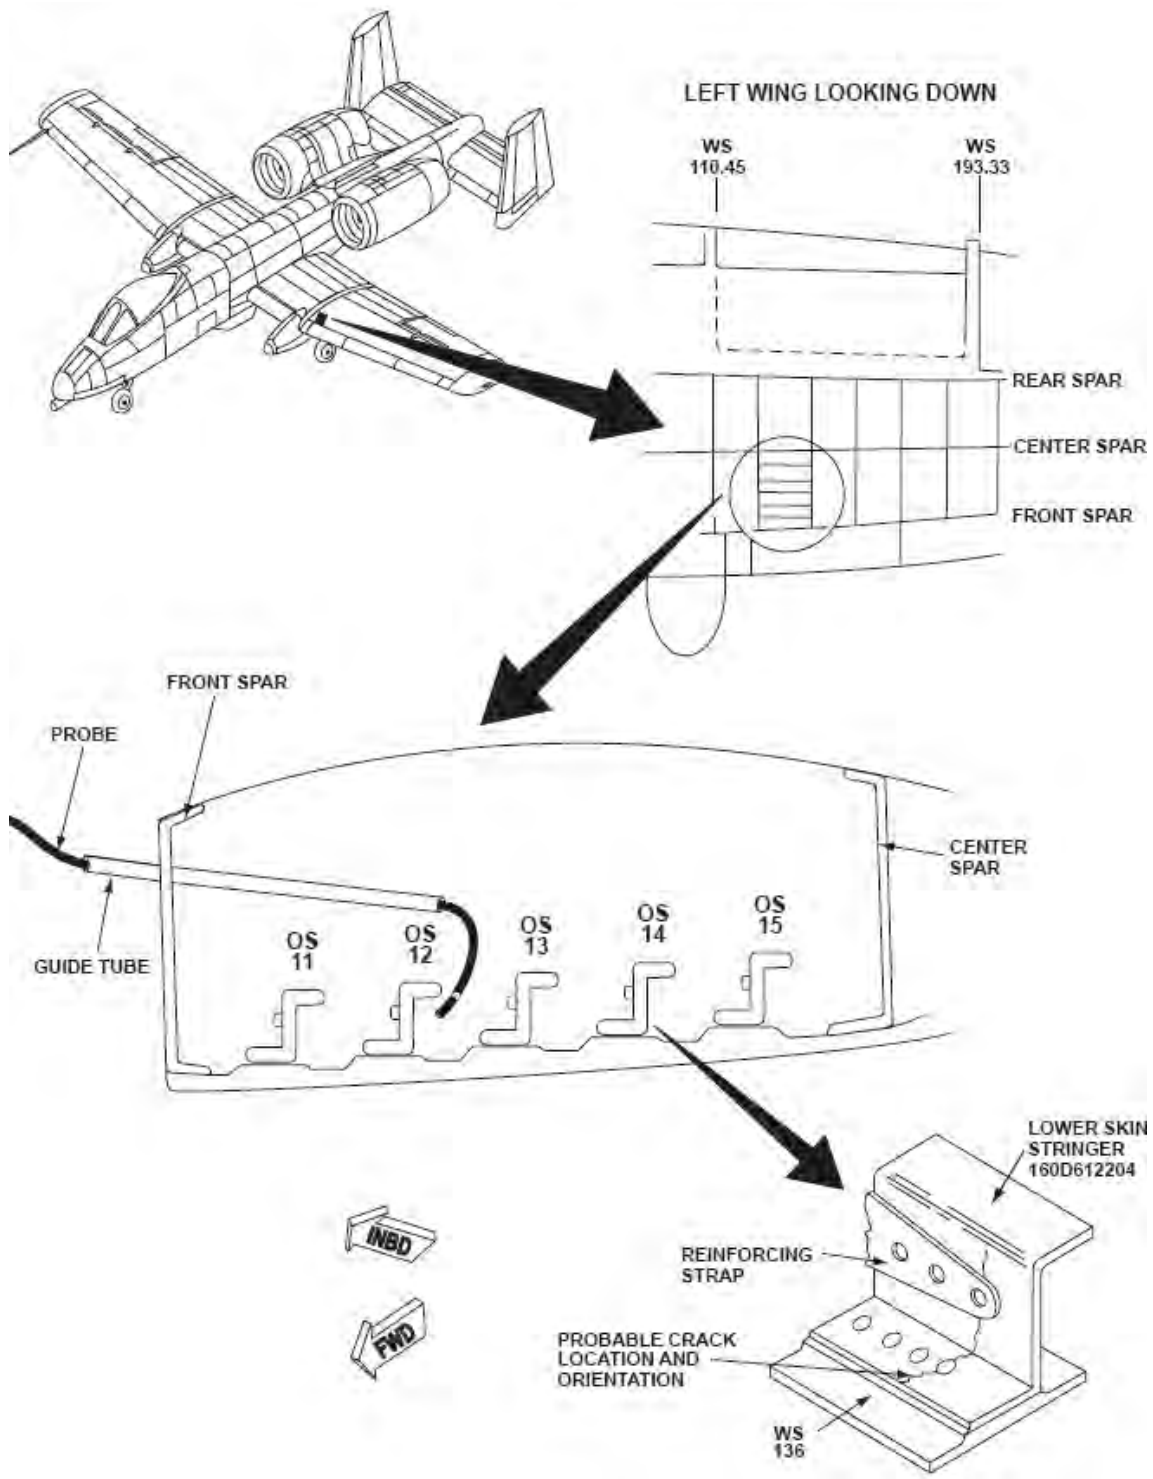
A-10 Boroscope Inspection at Stringer Doubler Runout.
